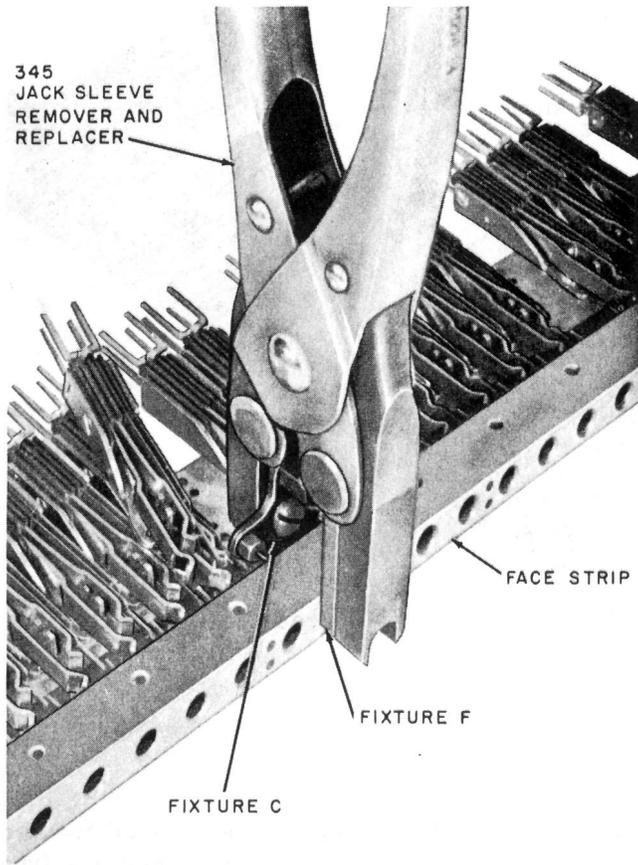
Method of Flaring Front of Sleeve on 510-, 511-, and 512-Type Jacks
